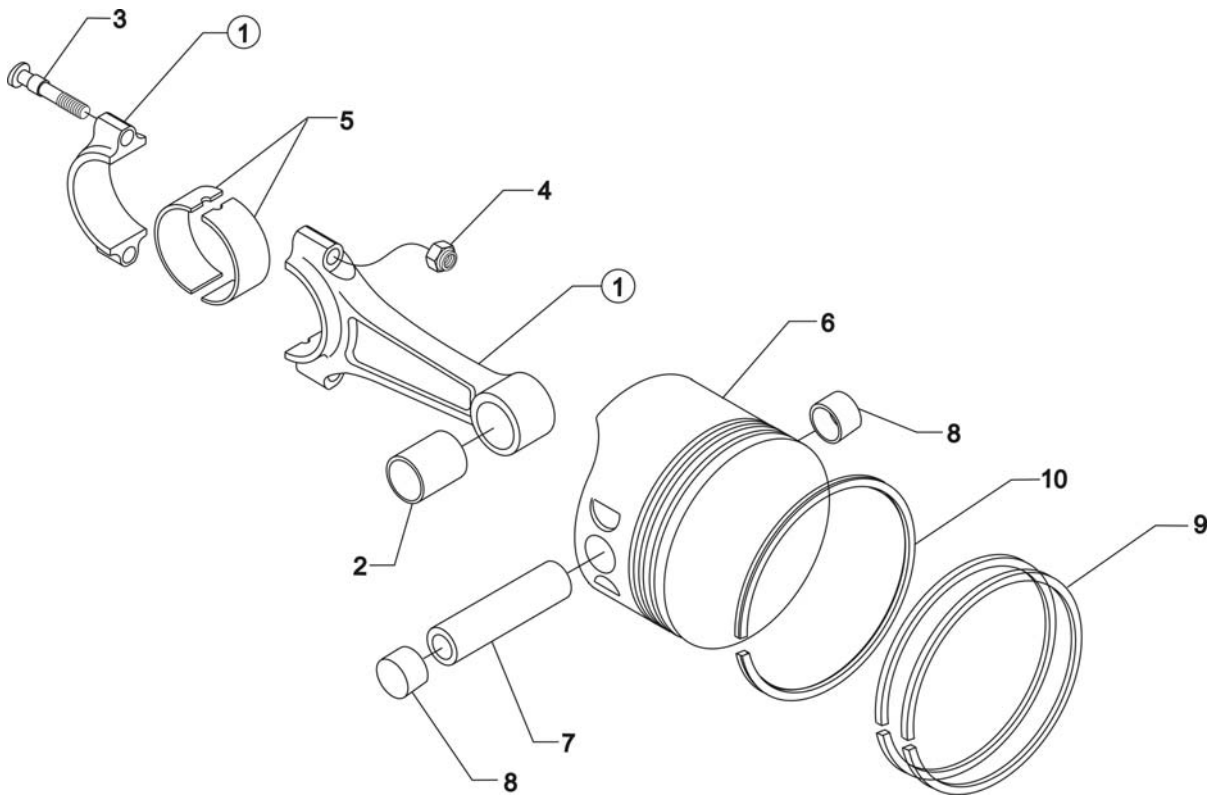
CONNECTING RODS, PISTON AND RING ASSEMBLIES
